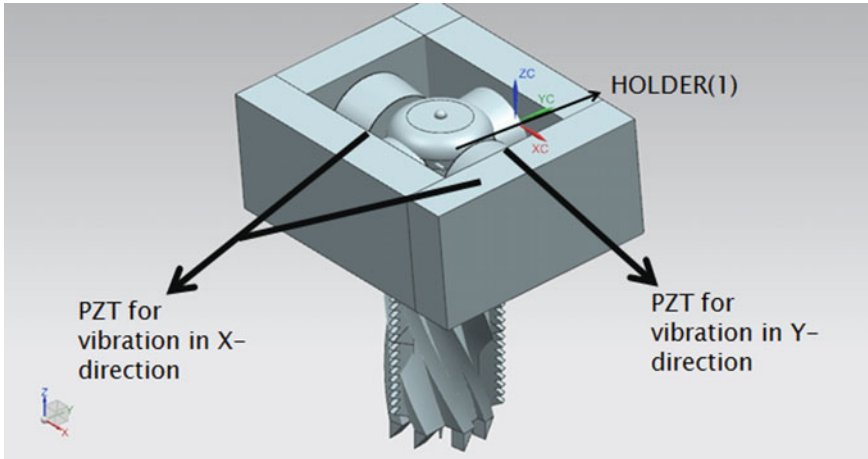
Proposed design for multipurpose cutter and piezoelectric stack assembly
